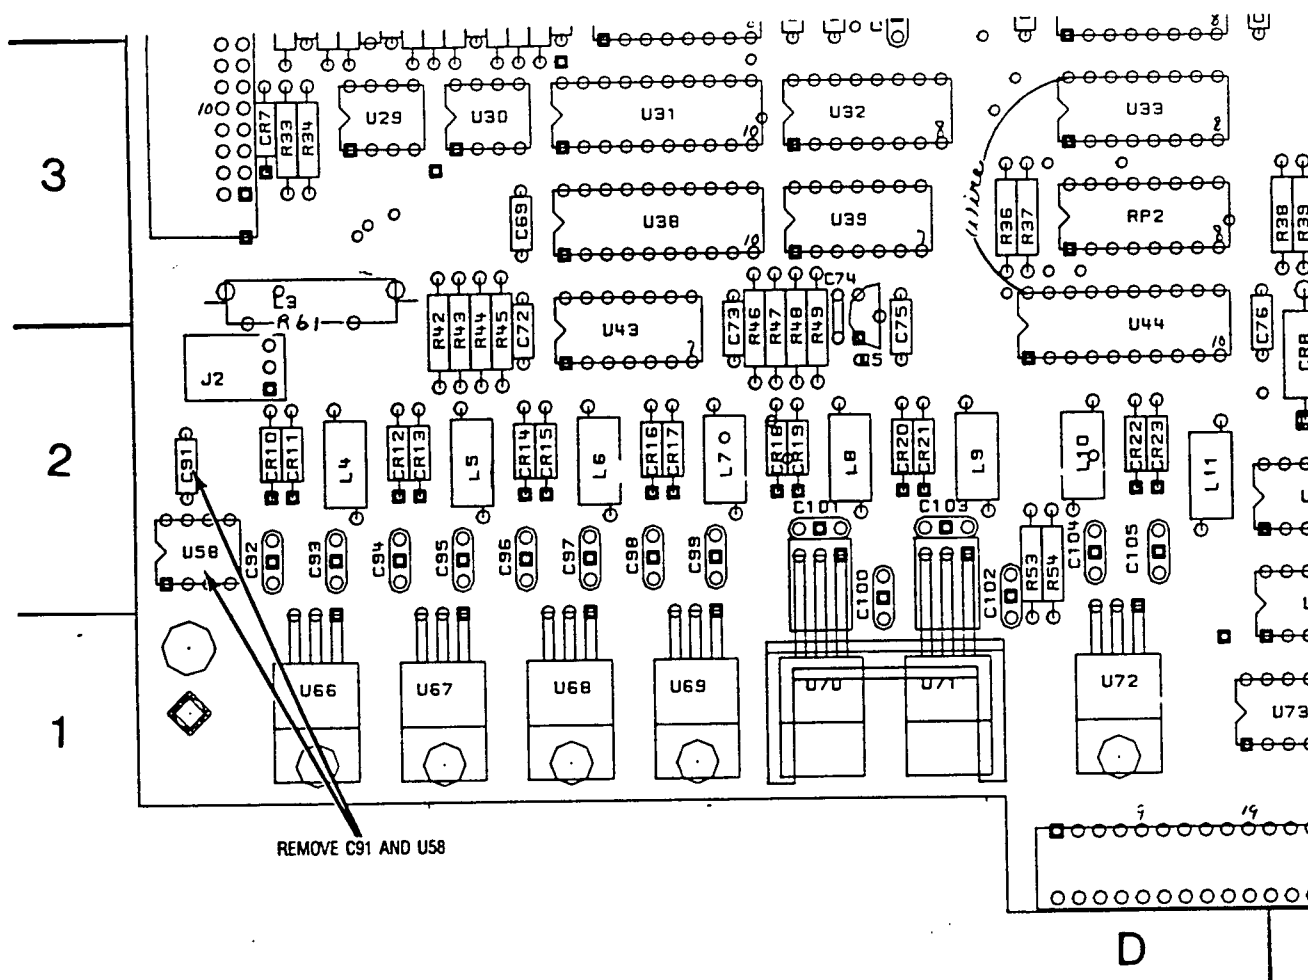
Acquisition Assembly A4 through A7 (Lower Left View of Assembly)
